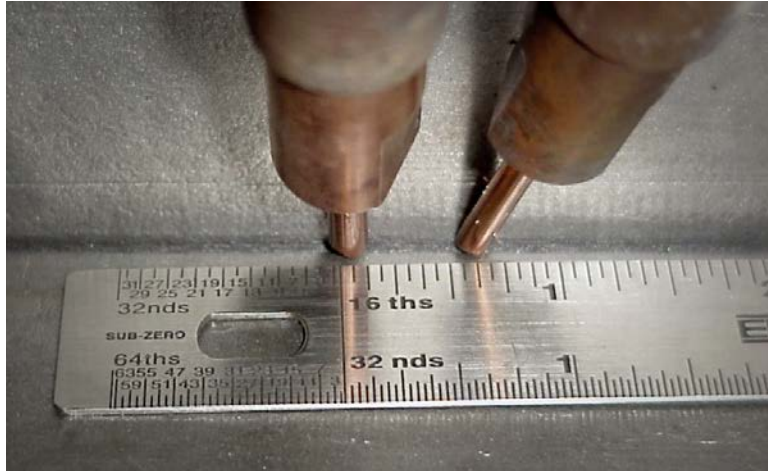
Horizontal Fillet Weld Spacing
